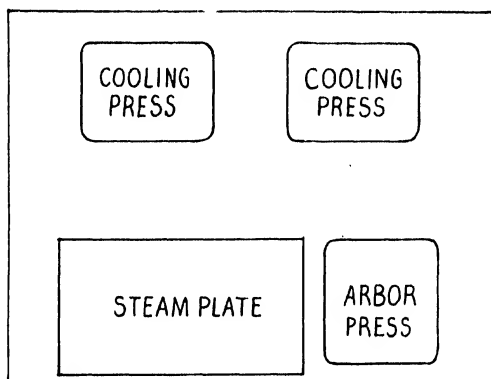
Floor Plan of Equipment Arranged for Molding Fusible Compositions.
